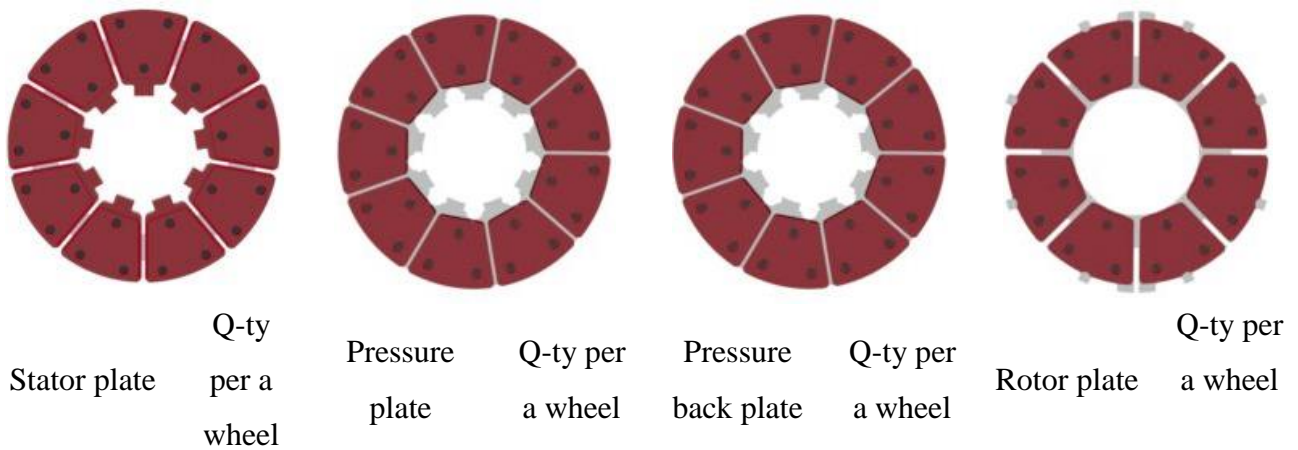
Structure and Design of the Disks that Form the Brake Unit of the Su-25 Aircraft Wheels
